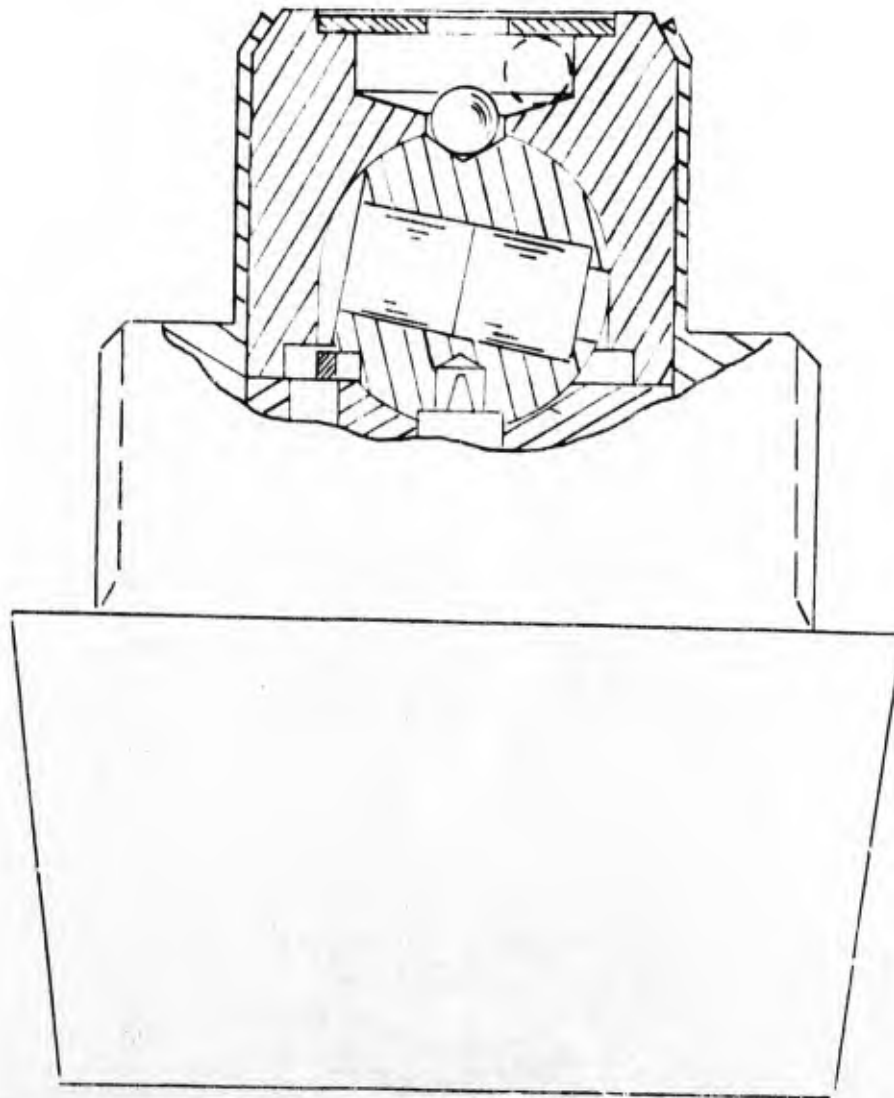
30mm SAPHE Fuze With Setback Rotor Lock
